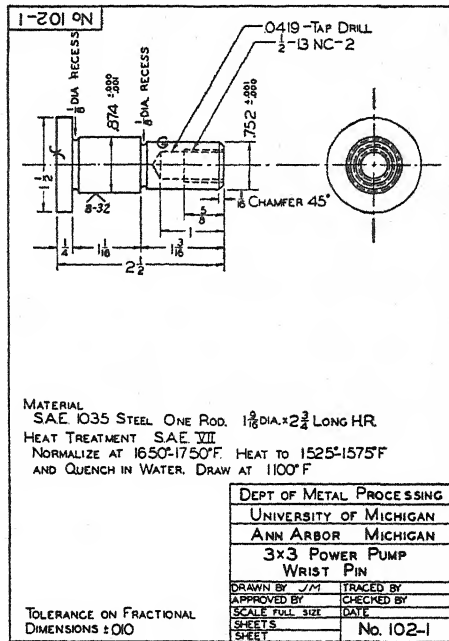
A Manufacturing Drawing of a Component Part with Tolerances and Information for Complete Processing.
